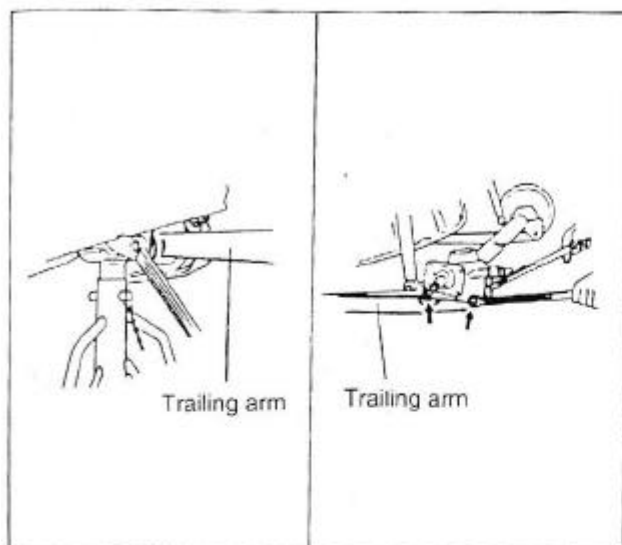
E — 7 REMOVAL OF TRAILING ARM
